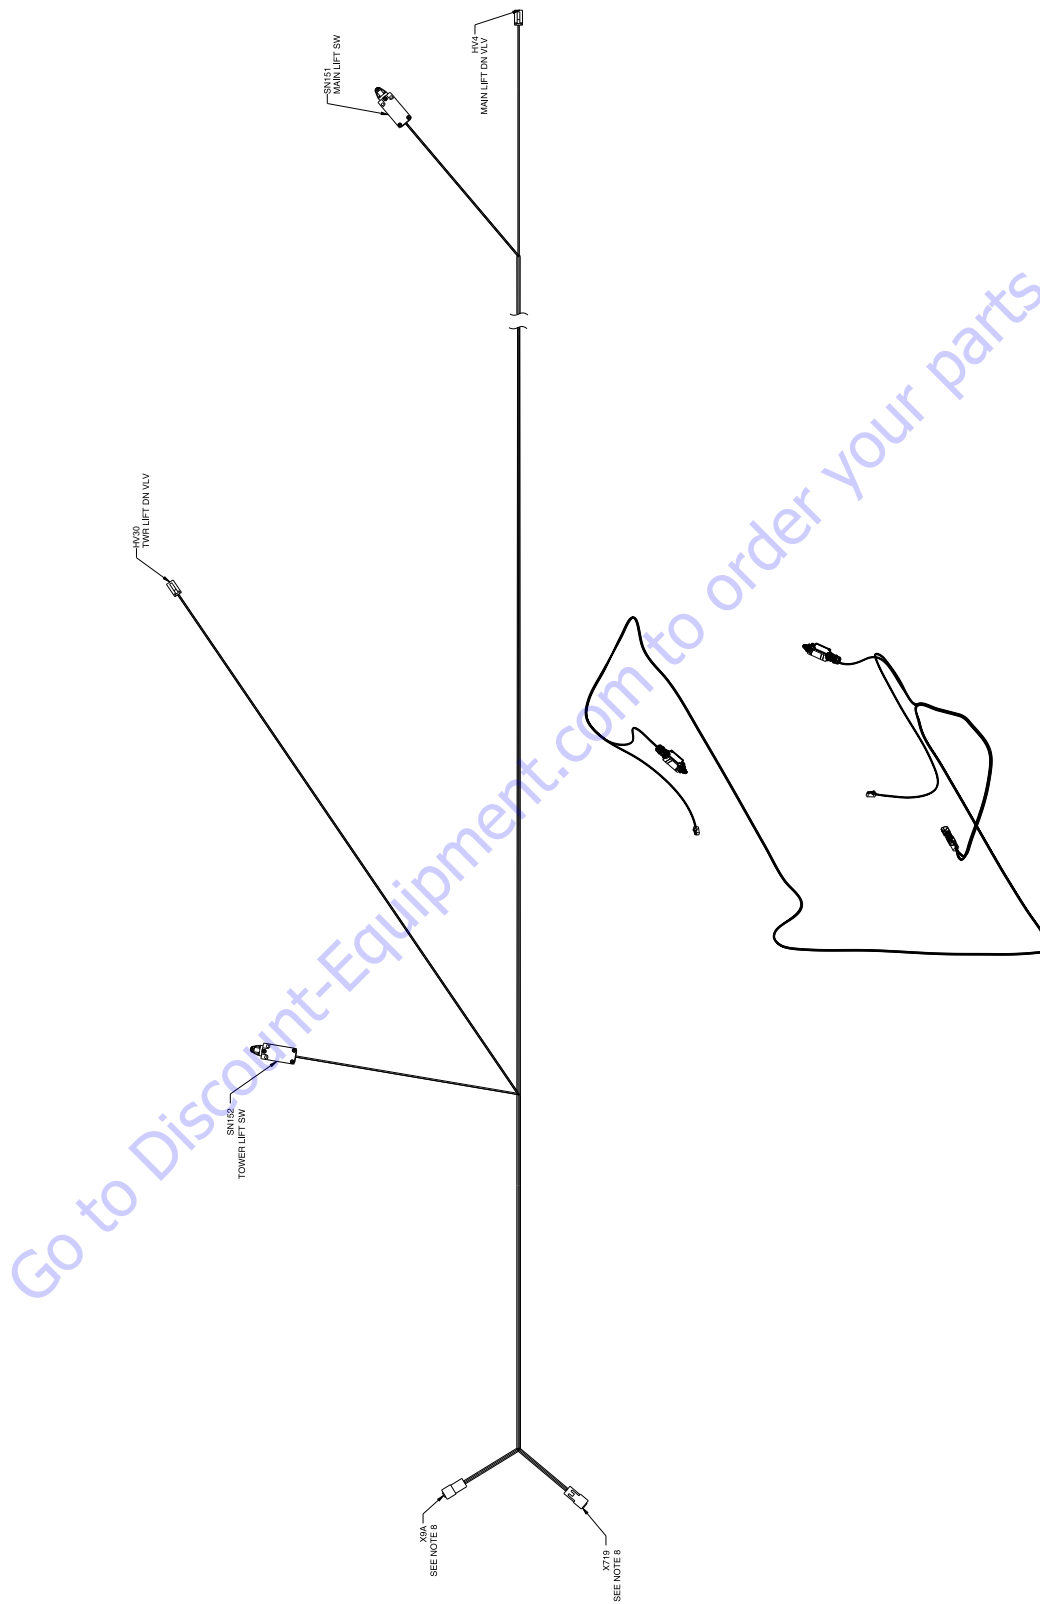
Boom Valve Harness - Sheet 1 of 2
